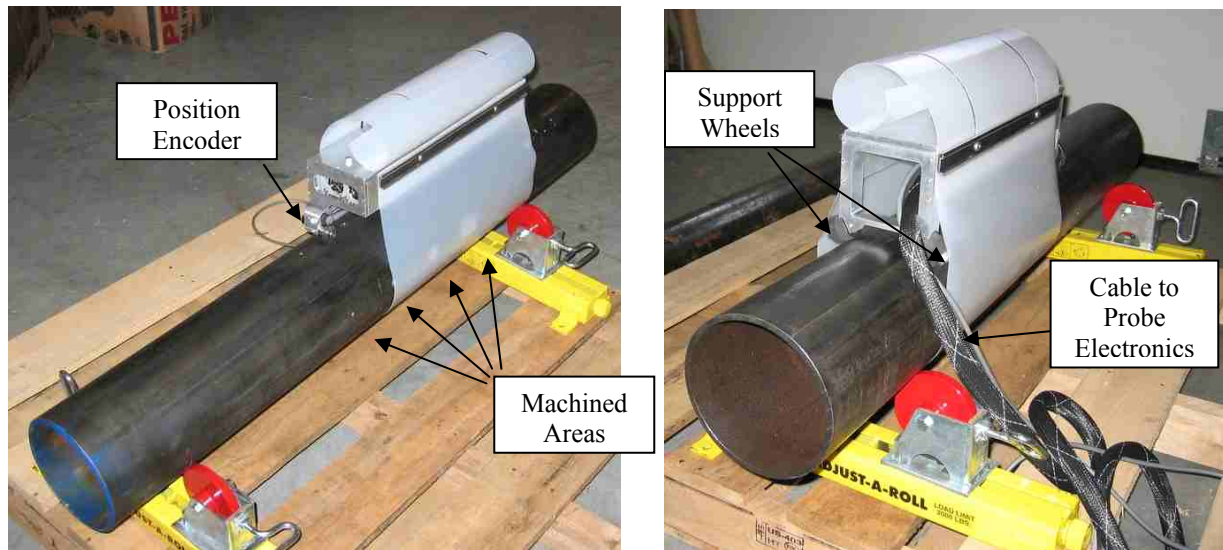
Photographs of a prototype fixture for external scanning of steel pipes.
